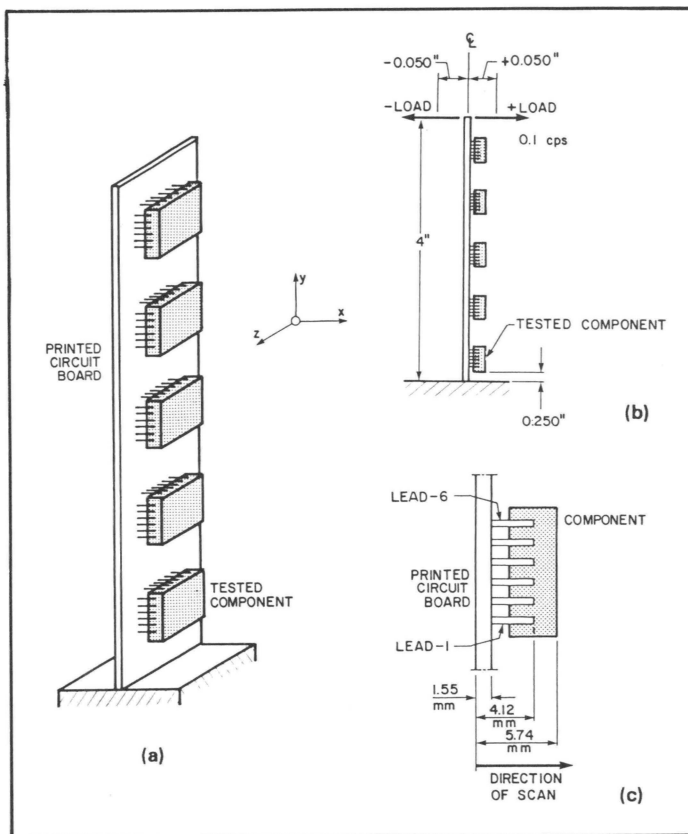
Printed circuit board and component assembly: (a) component definition and coordinate system, (b) assembly and loading specifications, (c) component geometry and direction of scan.
